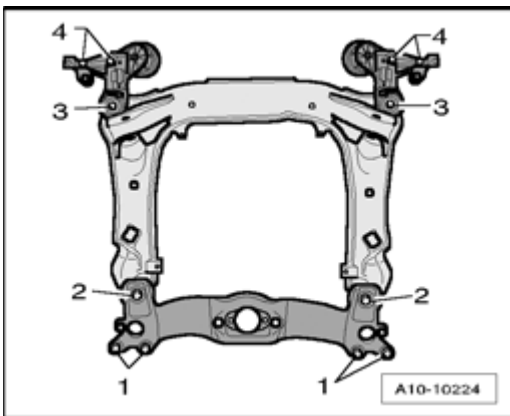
Removing/Installing Bolts In Diagonal Sequence And In Stages
